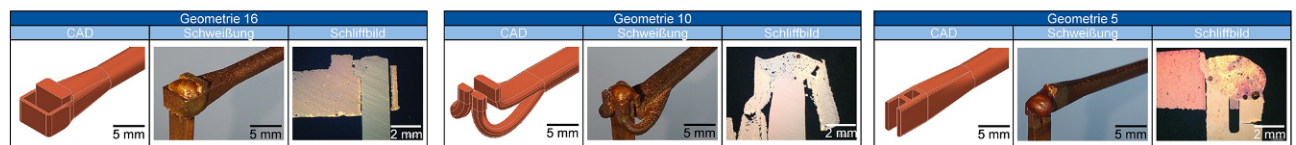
Results of the welding joint investigation exemplary shown for three welding samples
